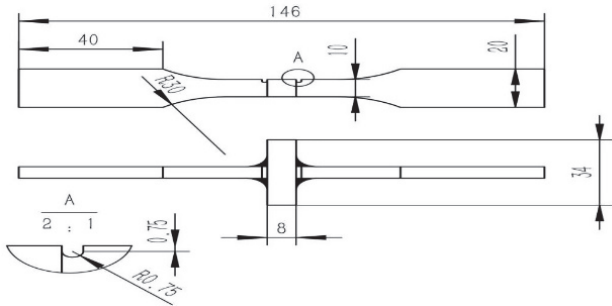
Dimension of load-bearing cross-welded joint
